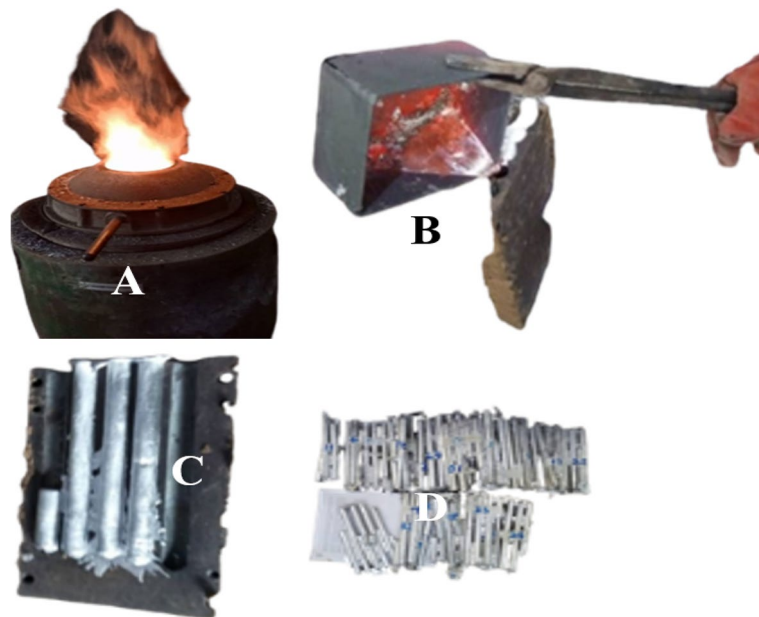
Sample preparation process. a Crucible. b Pouring liquid composite. c Demolding. d Specimen before machining
